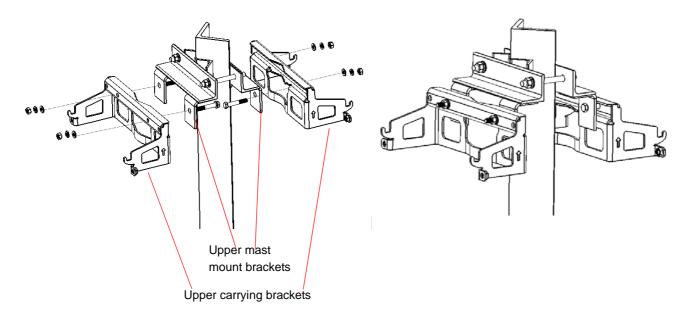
Assembling the Upper Carrying Brackets on the Mounting Brackets
